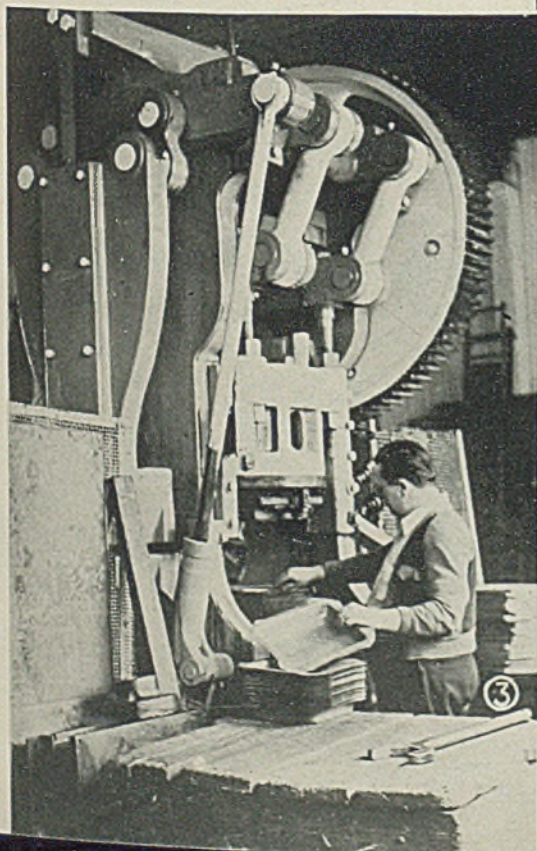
Double-action Bliss drawing press with a stroke of 12 inches, making it capable of handling a 6-inch draw
